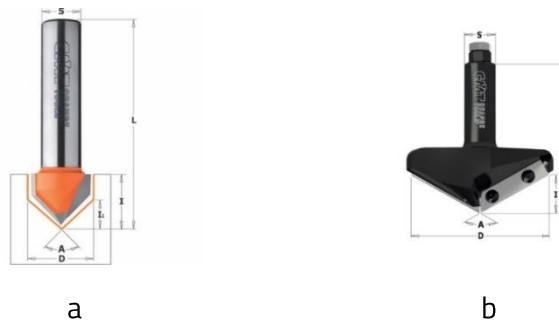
CNC milling cutters used: a - with a 90° angle; b - with a 120° angle.
